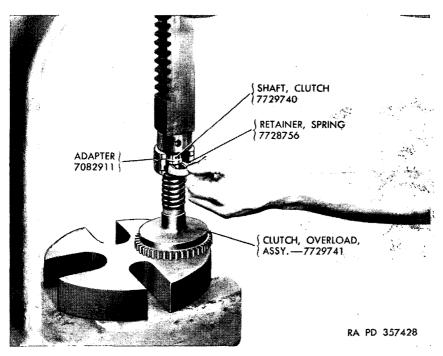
Removing or installing retainer on clutch gear and shaft assembly.
